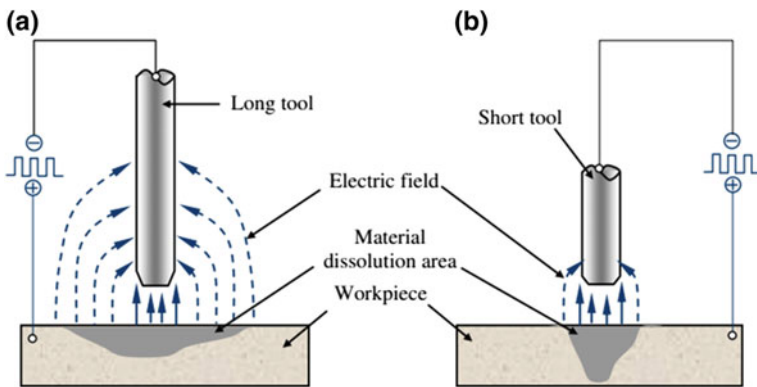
Schematics for machining region in EMM for a long and b short microtool [10]
